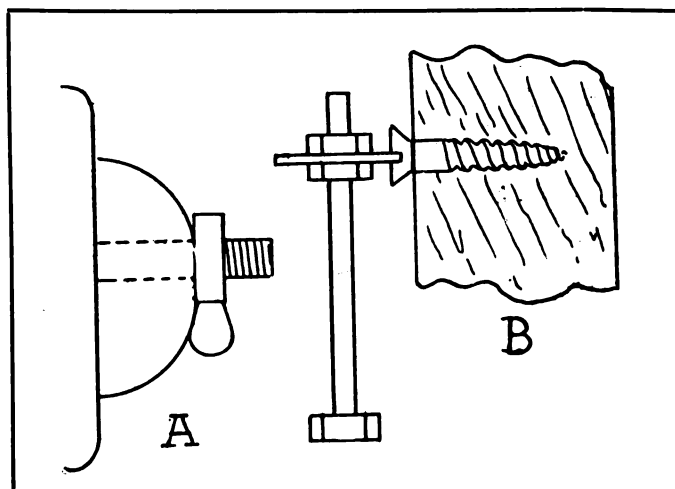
A, Simple Manner of Retaining Winged Nut; B, Emergency Screw Driver of Bolt, Nuts and Washer.
